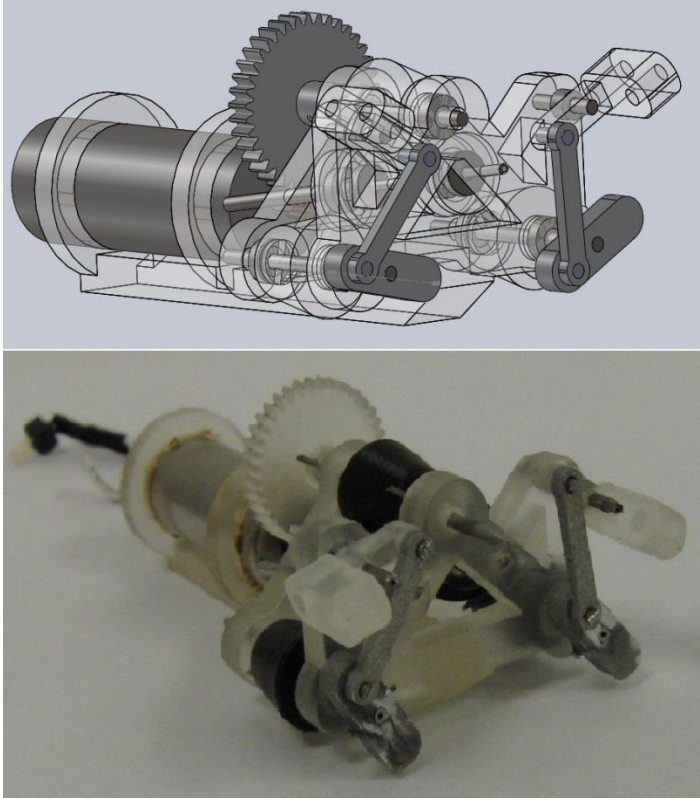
The third prototype rendered in Solidworks and produced using 3-D printing and wire EDM.
